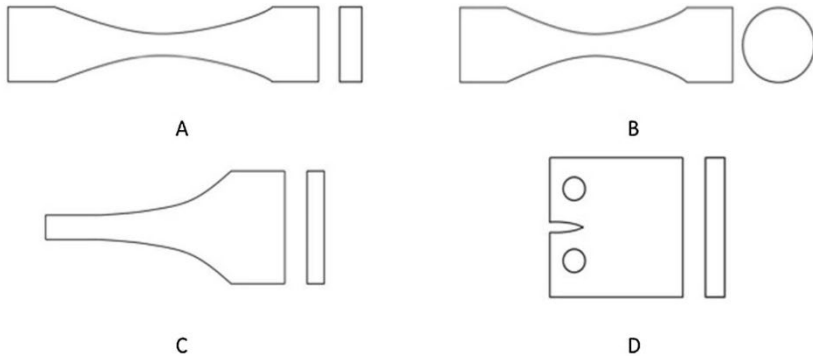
Four examples of fatigue testing specimens that include A) an axial loading specimen, B) a rotating bending specimen, C) a reverse bending specimen, and D) a fracture mechanical test specimen.
